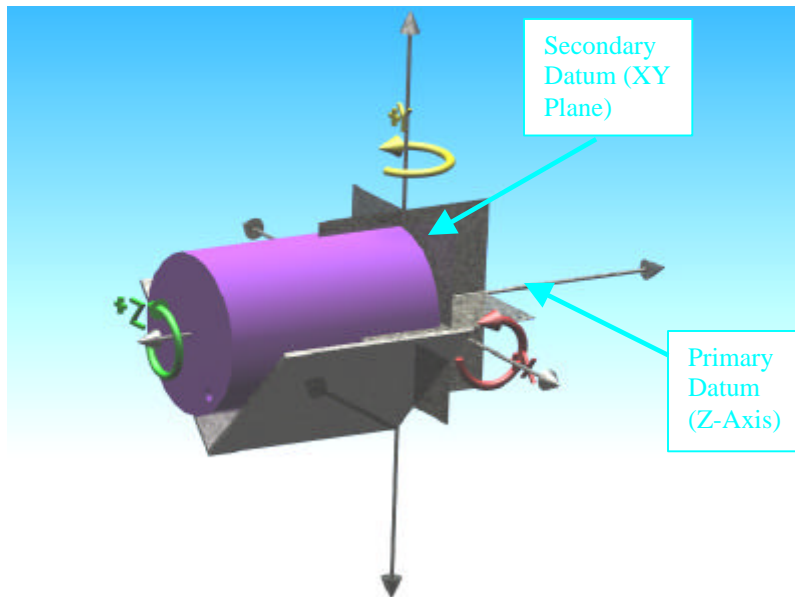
Illustration of coordinate system showing part with contact on primary datum.
